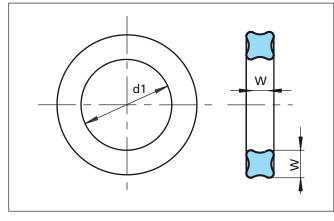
Quad-Ring<sup>®</sup> Seal dimensioning
